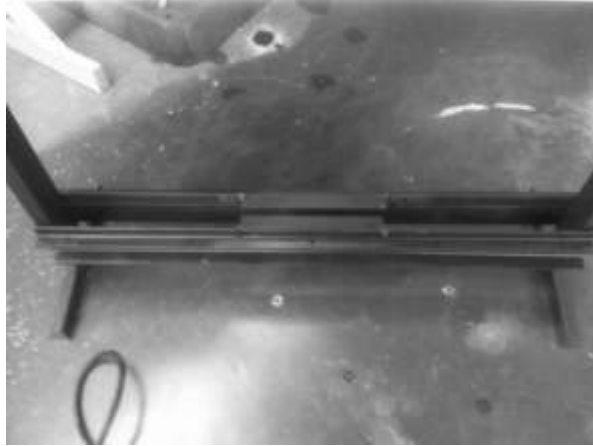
Bottle Jack Welded to Top Die Kick Plate and Prepped for Welding to Top Mounts.
